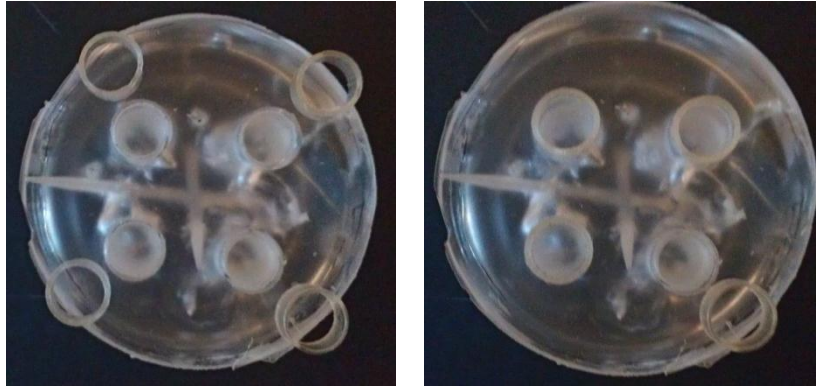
Bottom of mold prior to spacers being inserted (Left). Bottom of valve mold with three of the four spacers inserted into the mold (Right).
